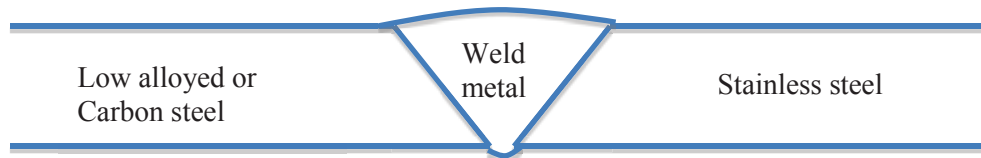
, Schematic picture of a dissimilar metal weld
